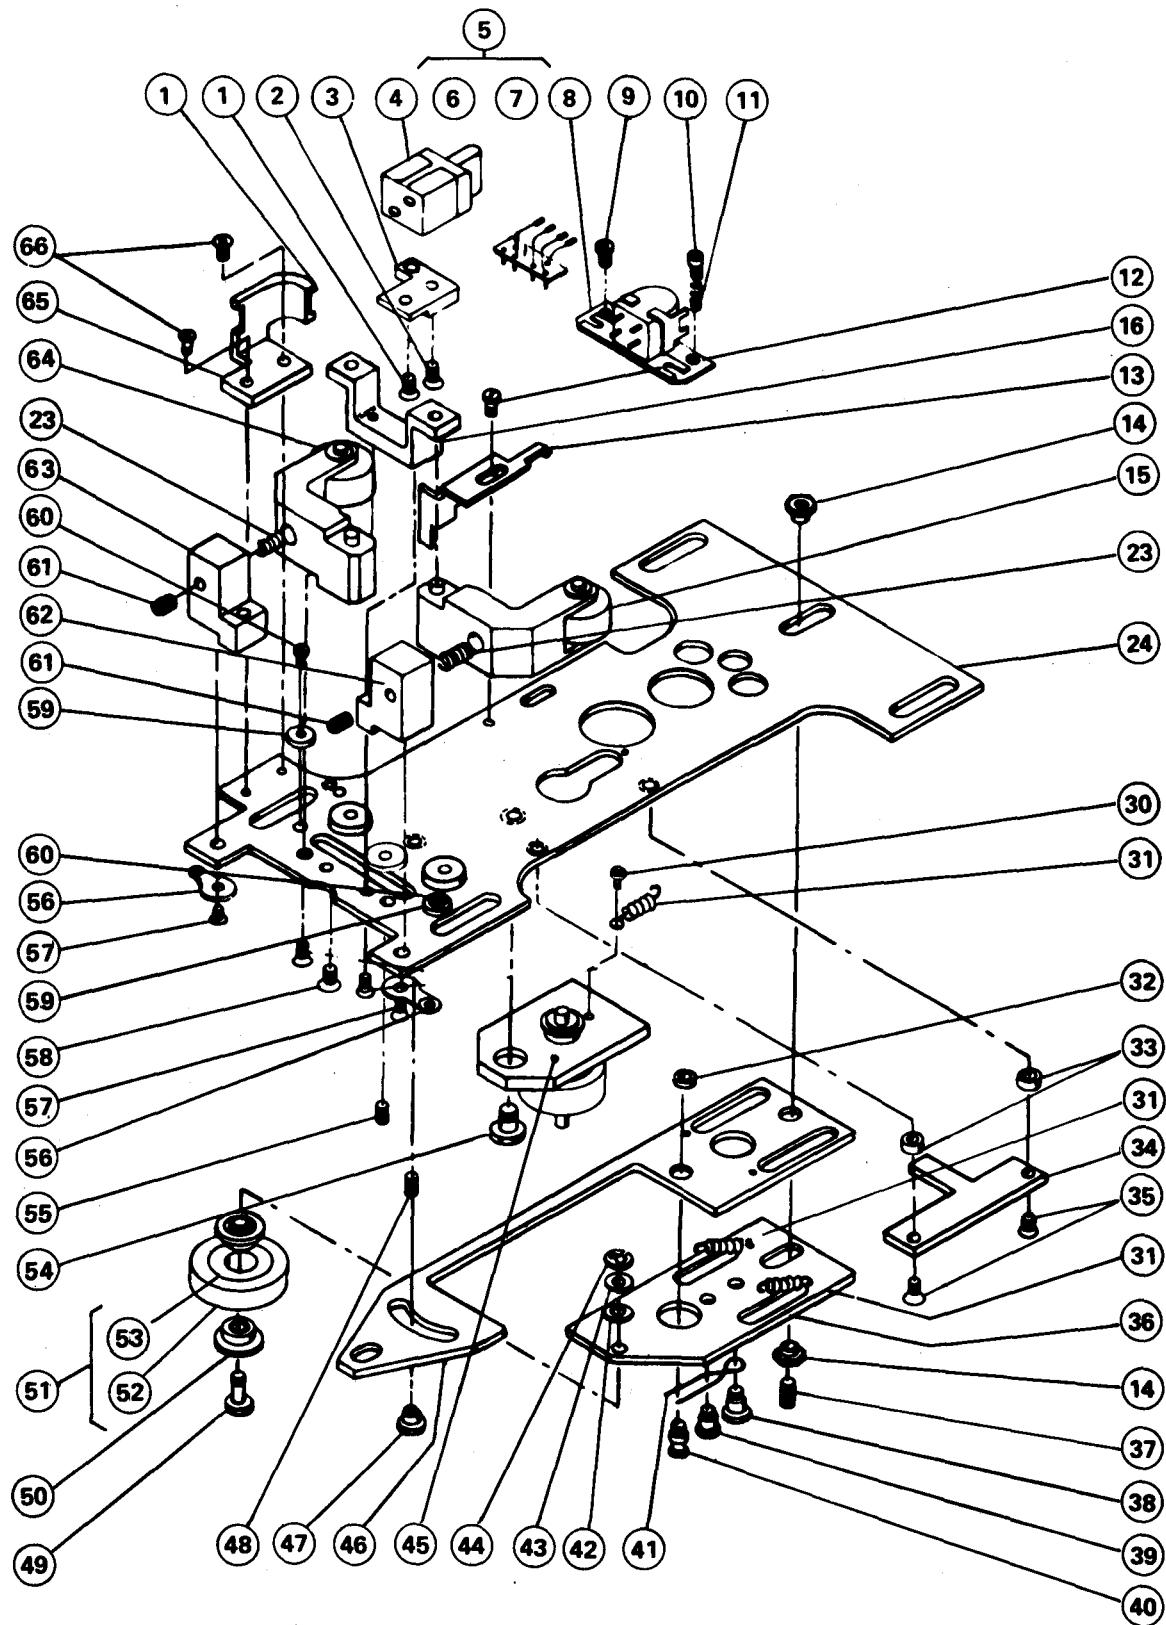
Slide plate subassembly (sheet 1 of 2)
